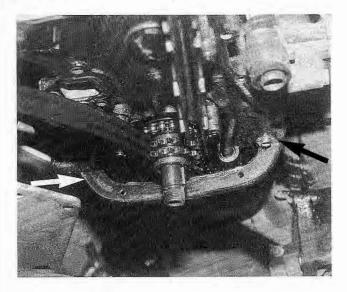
Area of òil pan gasket requiring extra gasket sealer (arrows).
